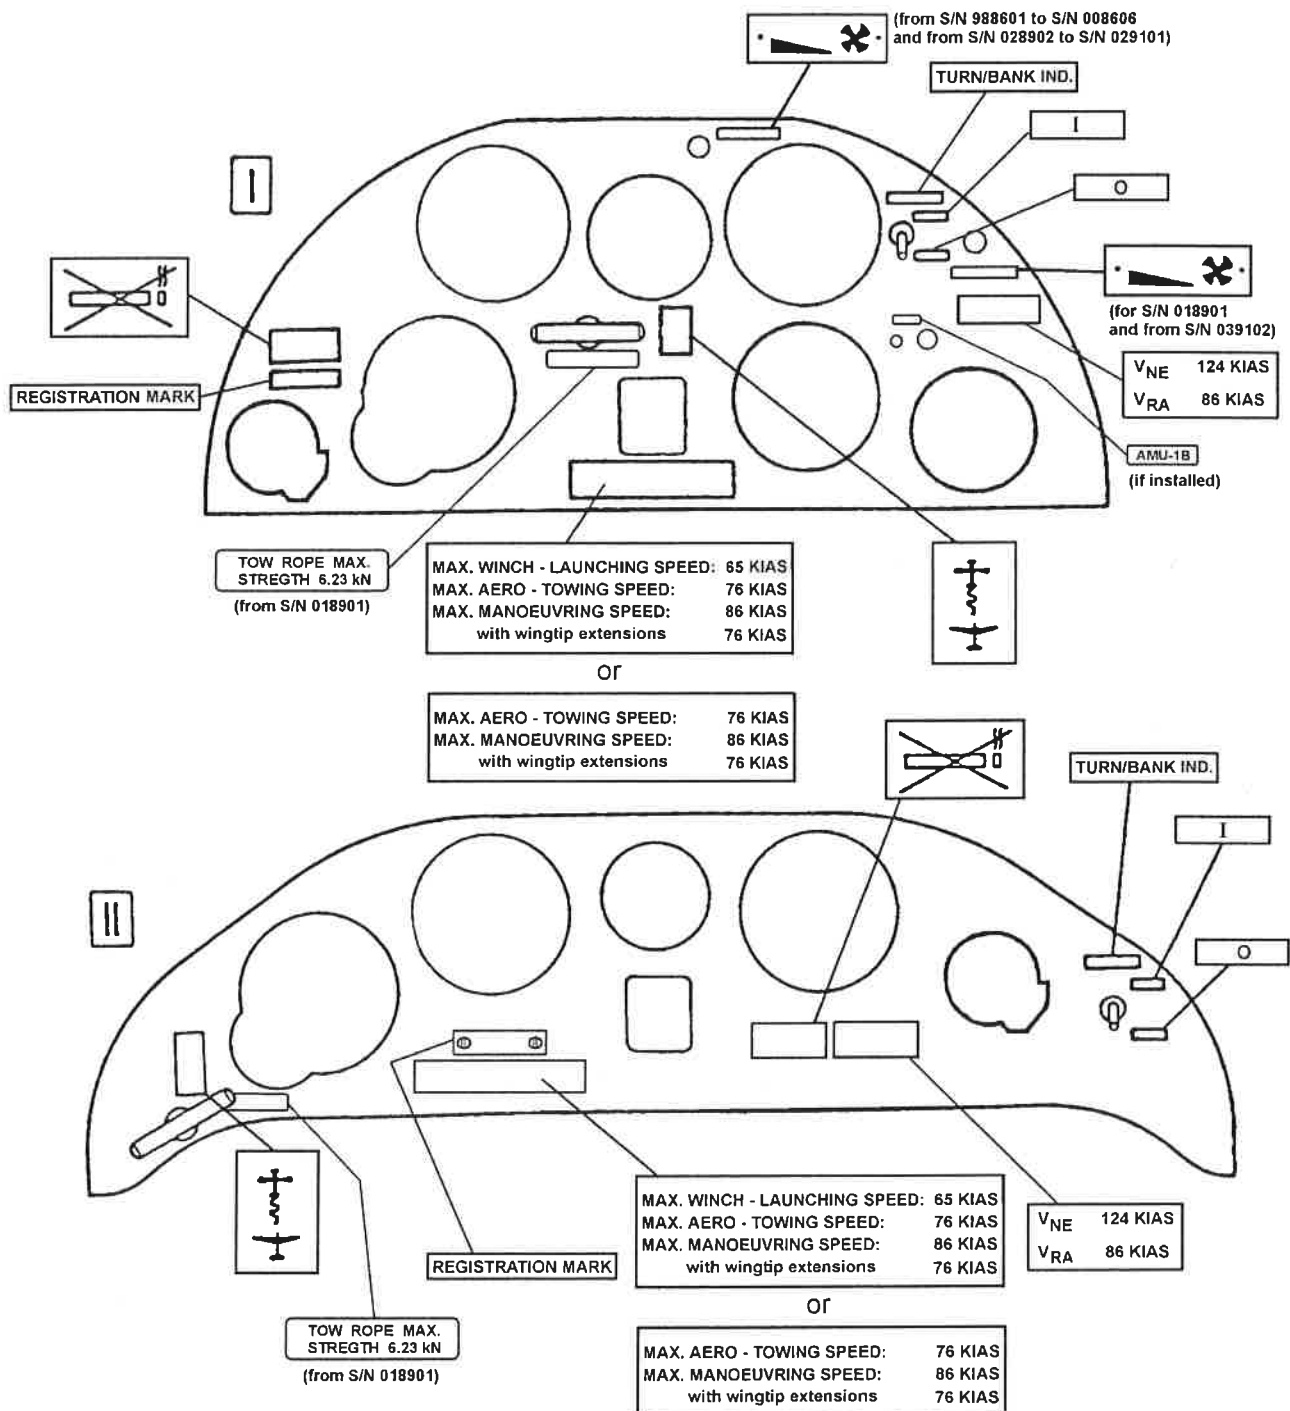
INSIDE PLACARDS AND MARKINGS - RIGHT SIDE OF FRONT AND AFT COCKPITS
